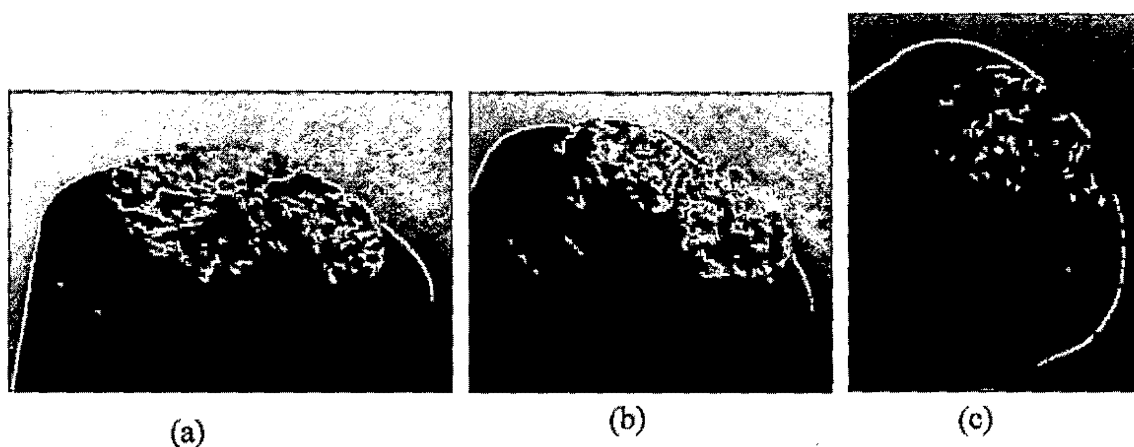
Isometric view of fracture surfaces of blunt notched specimen from tensile experiments at (a) 0.5 mm/s, (b) 0.05 mm/s, and (c) 0.005 mm/s.
